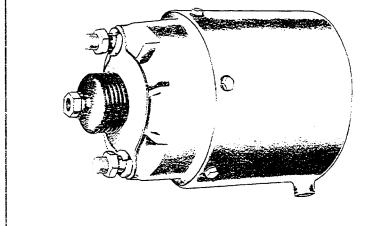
EXTERIOR VIEW SPRING BRAKE ACTUATOR
